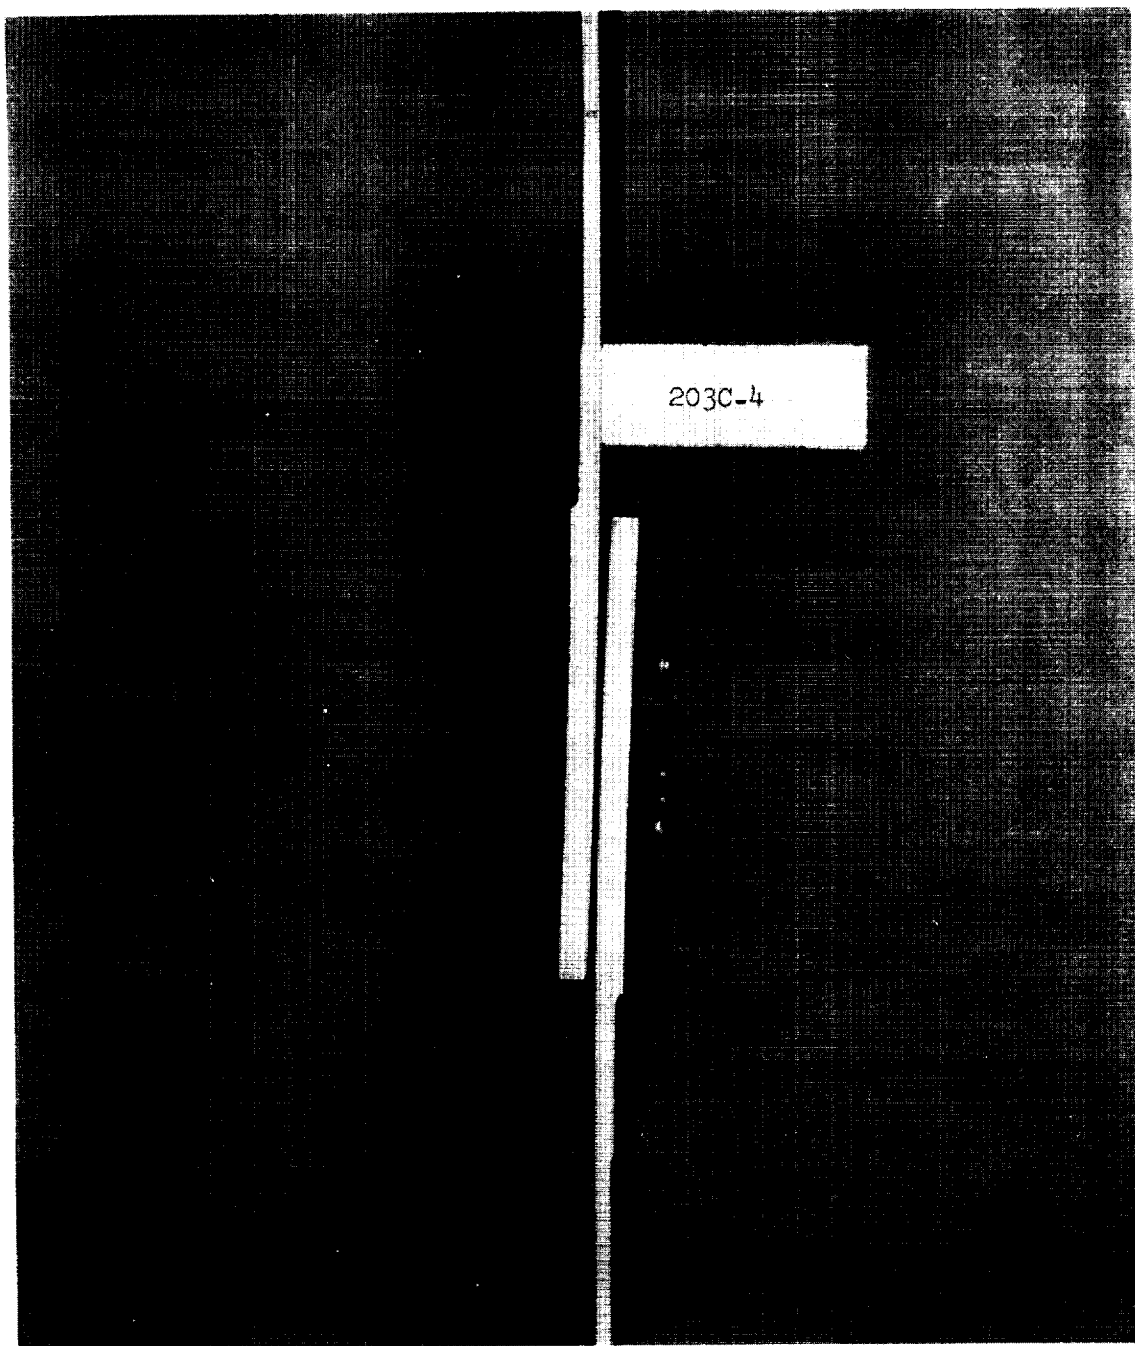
TYPE IIIC SPECIMENS - CHERRY BLIND RIVETS
